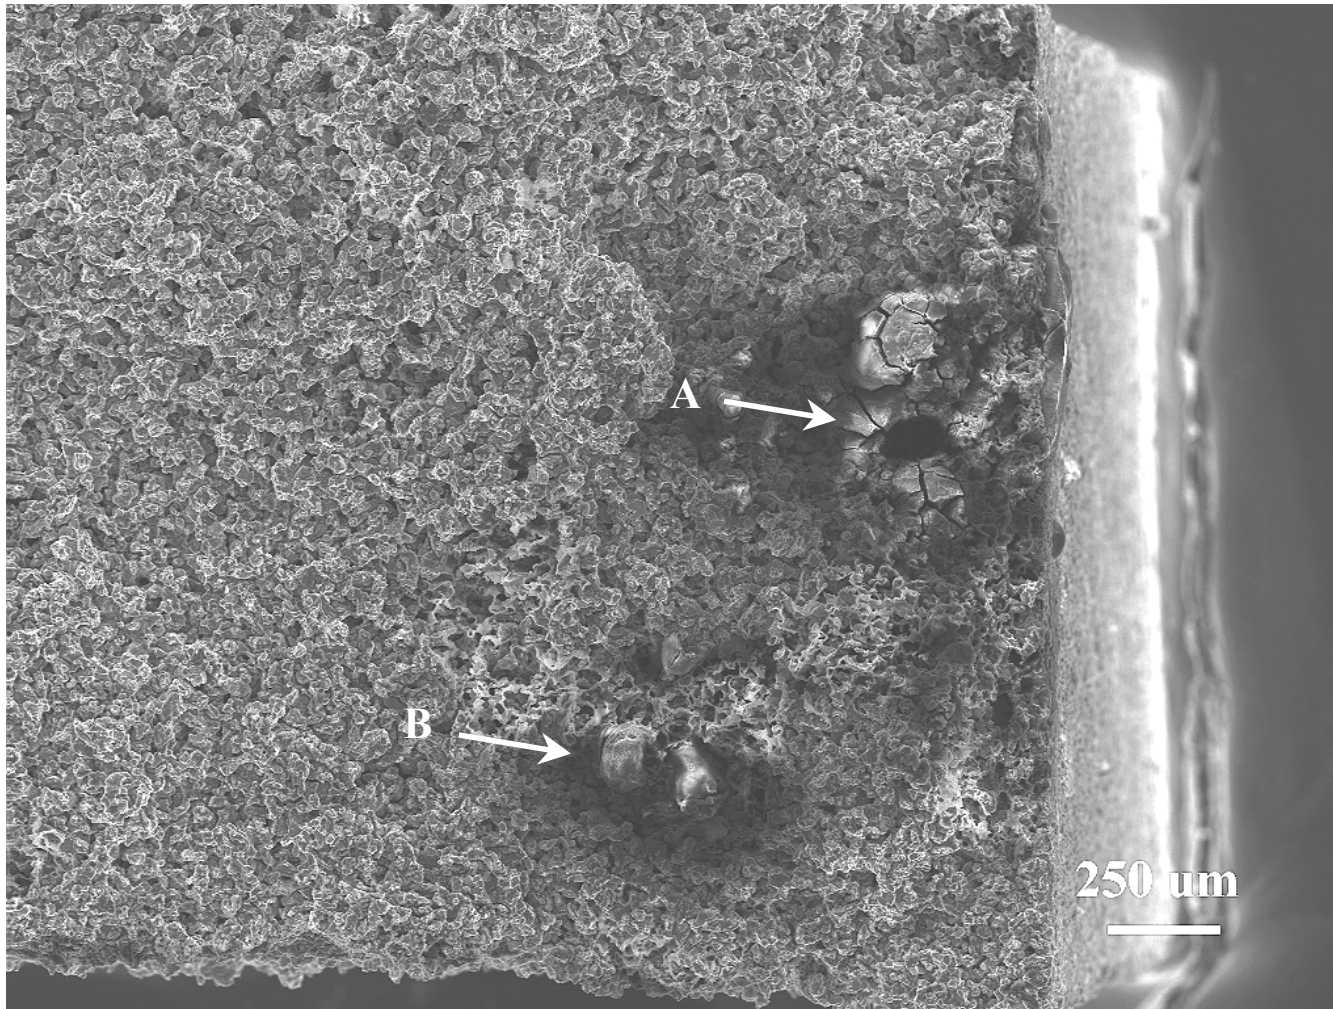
Fracture Surface of Fe₃Al Tensile Specimen Tn-Ax-16 – Location 2
